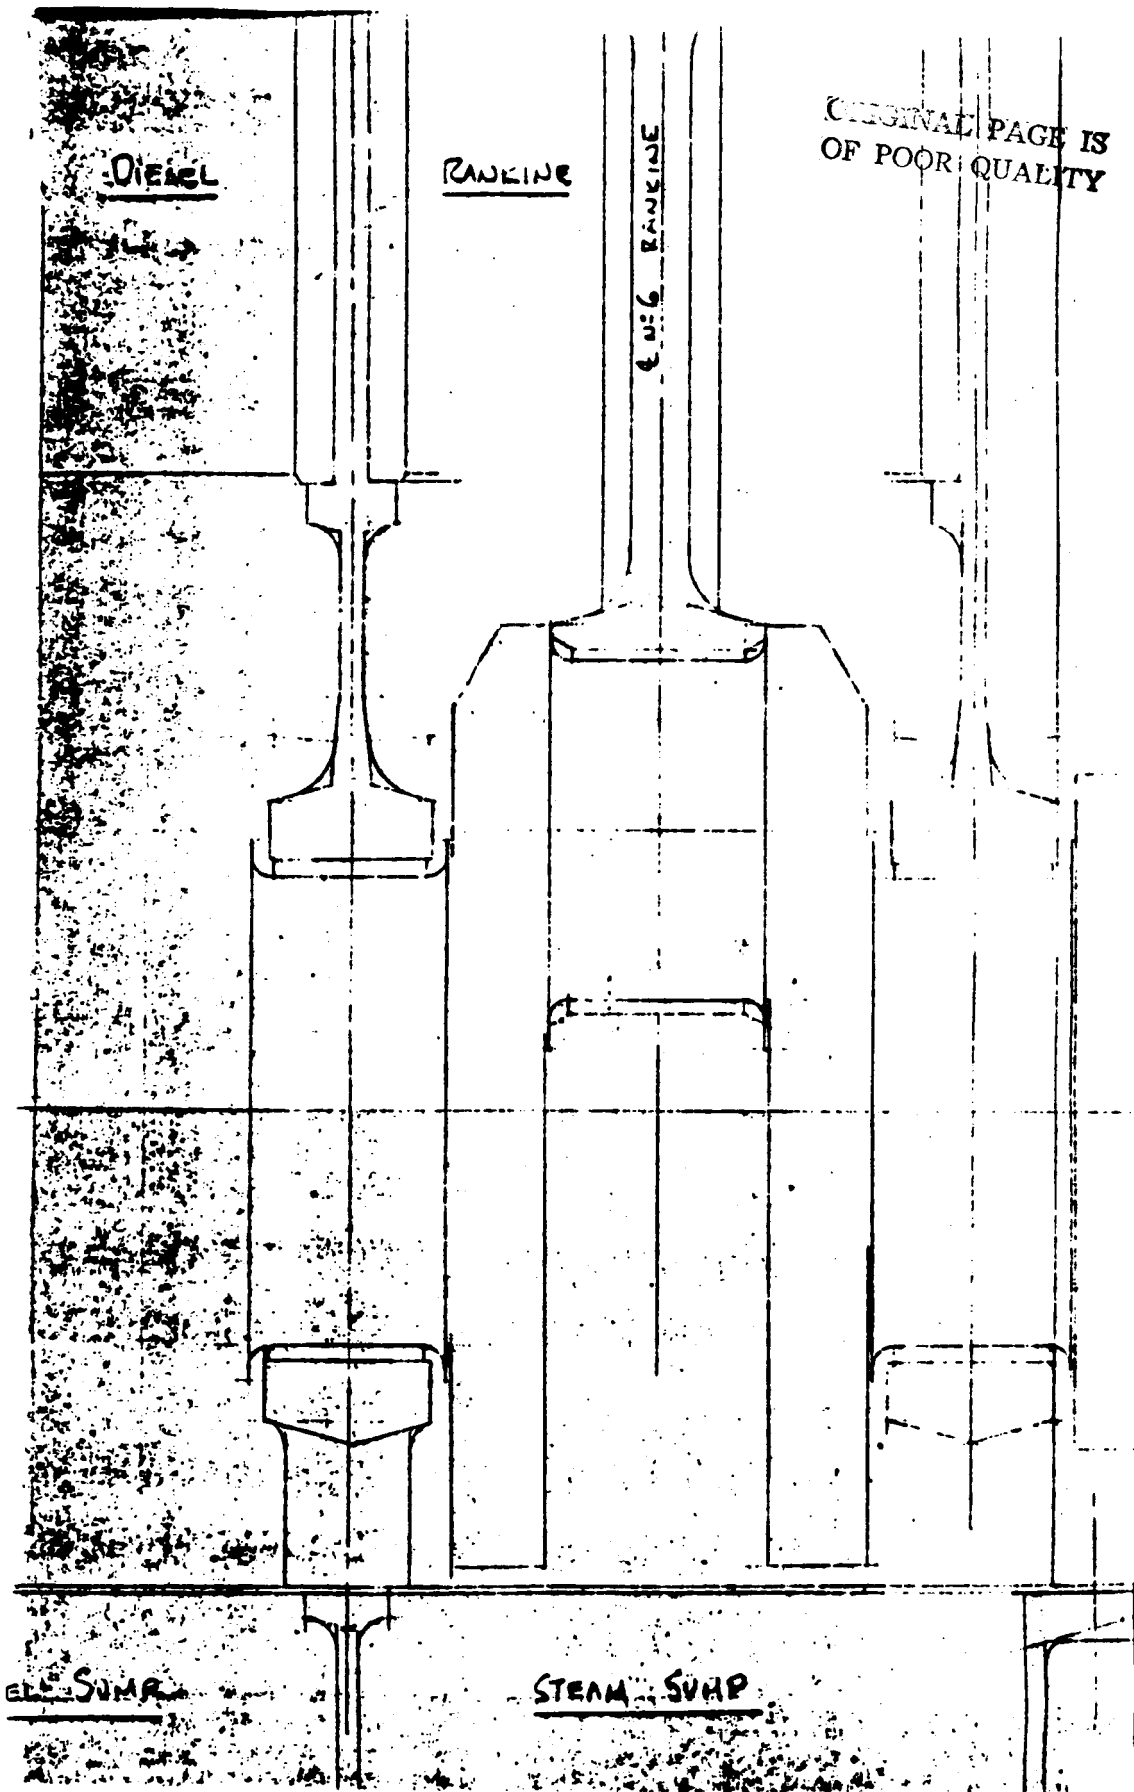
Crank/Sump Layout for the Steam Cylinder
